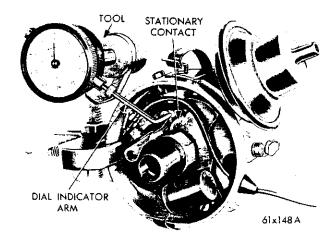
Adjusting the Point Clearance with a Dial Indicator
